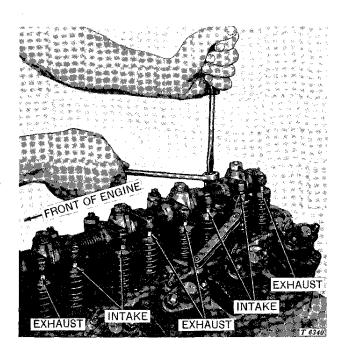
Adjusting Valve Tappet Clearance
